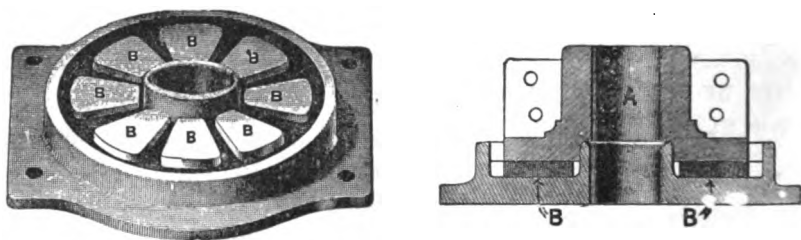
Geylin (Patent) Glass Suspension Bearing (R. D. Wood & Co.).
